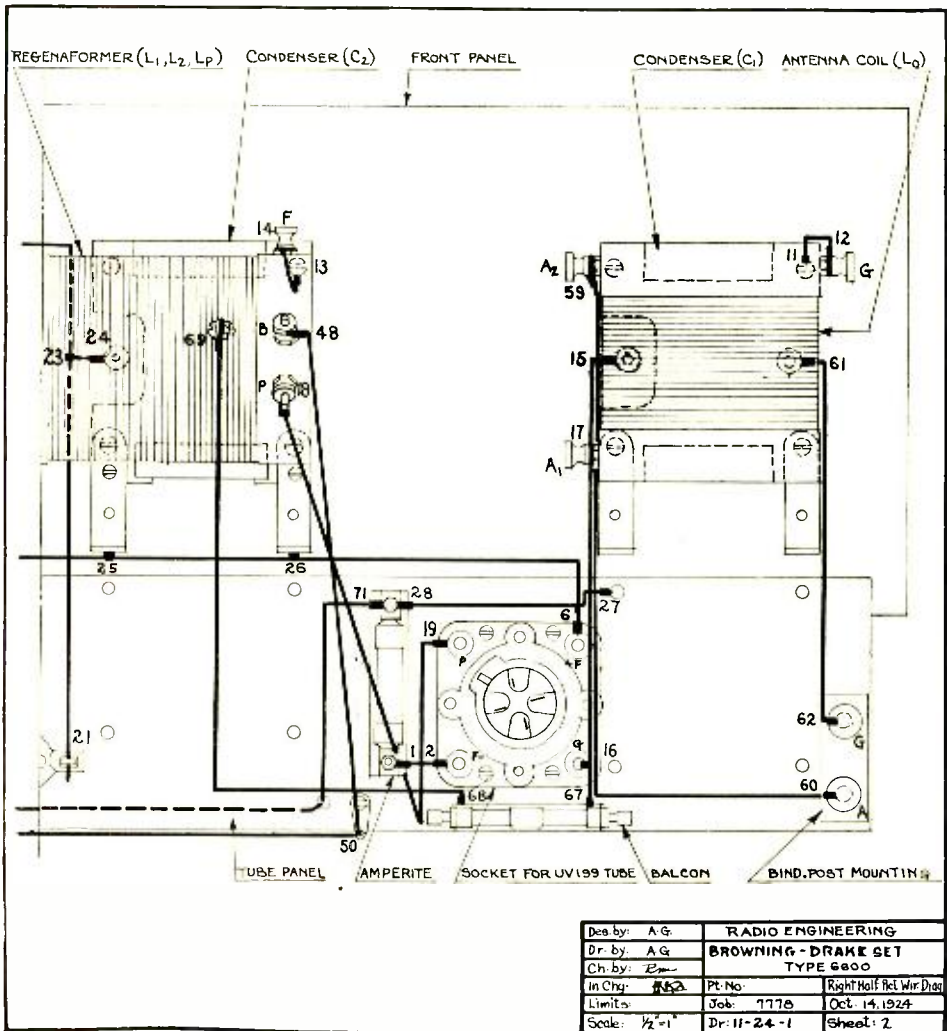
The tube panel is tipped down so that you see the rear of the front panel and the top of the tube panel.
